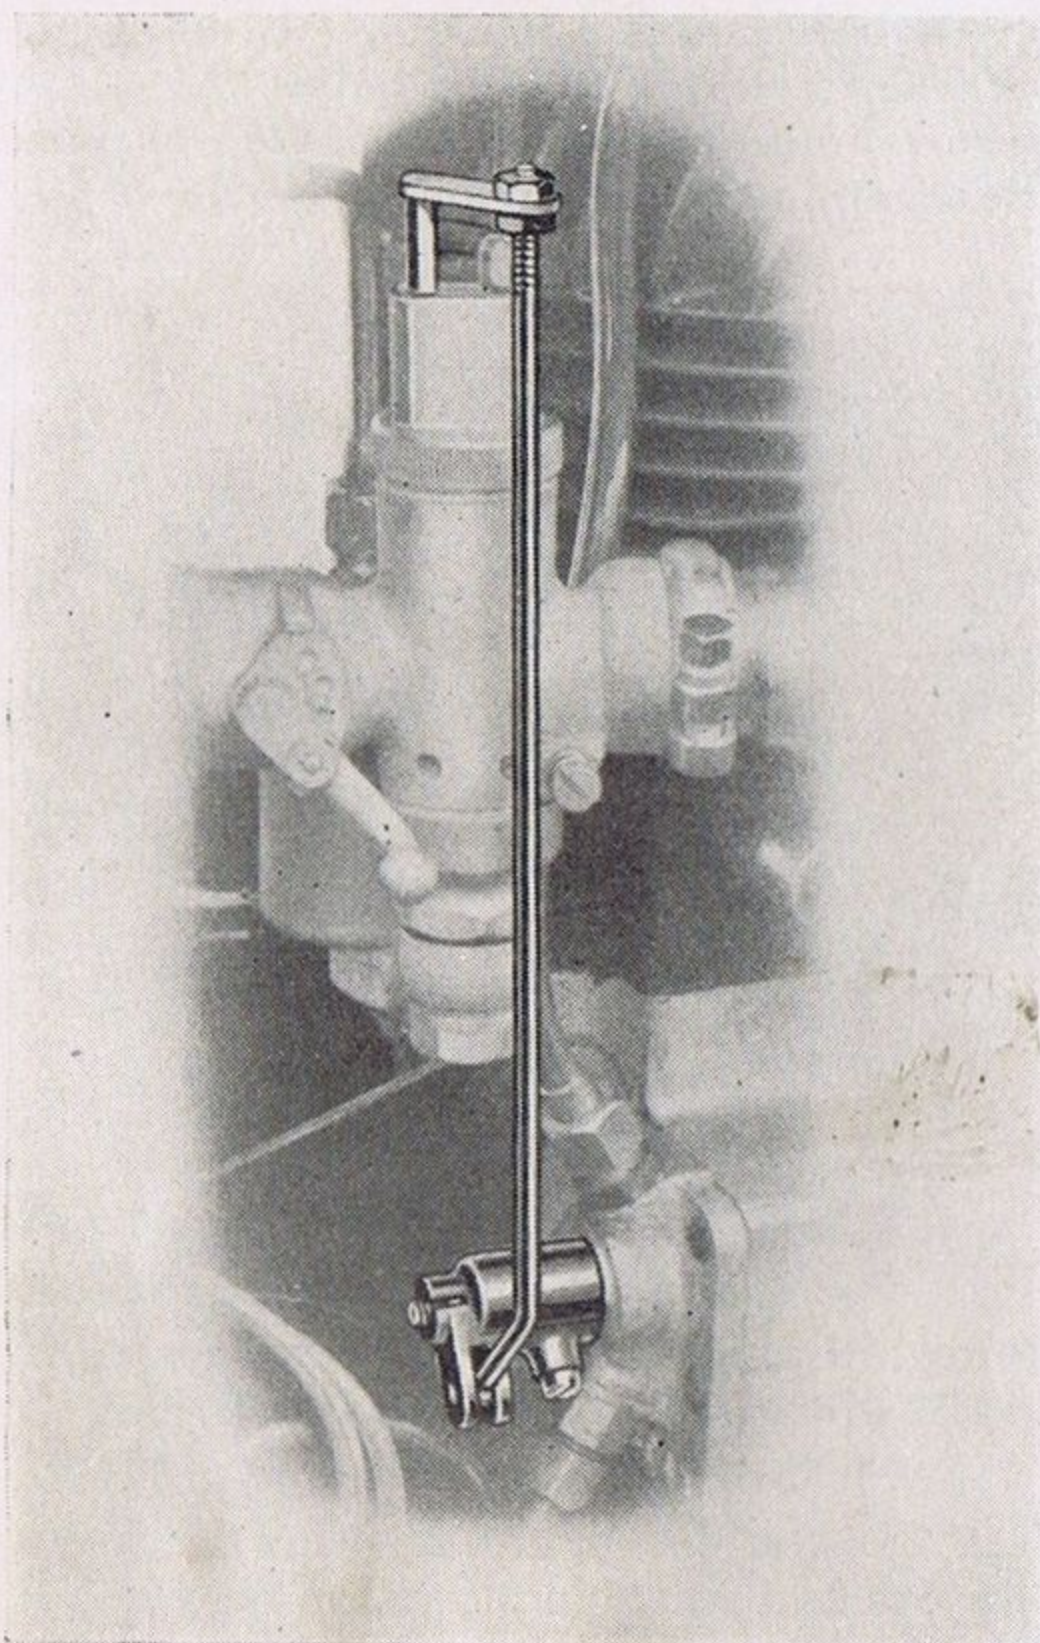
THROTTLE CONTROL OF LUBRICATION
